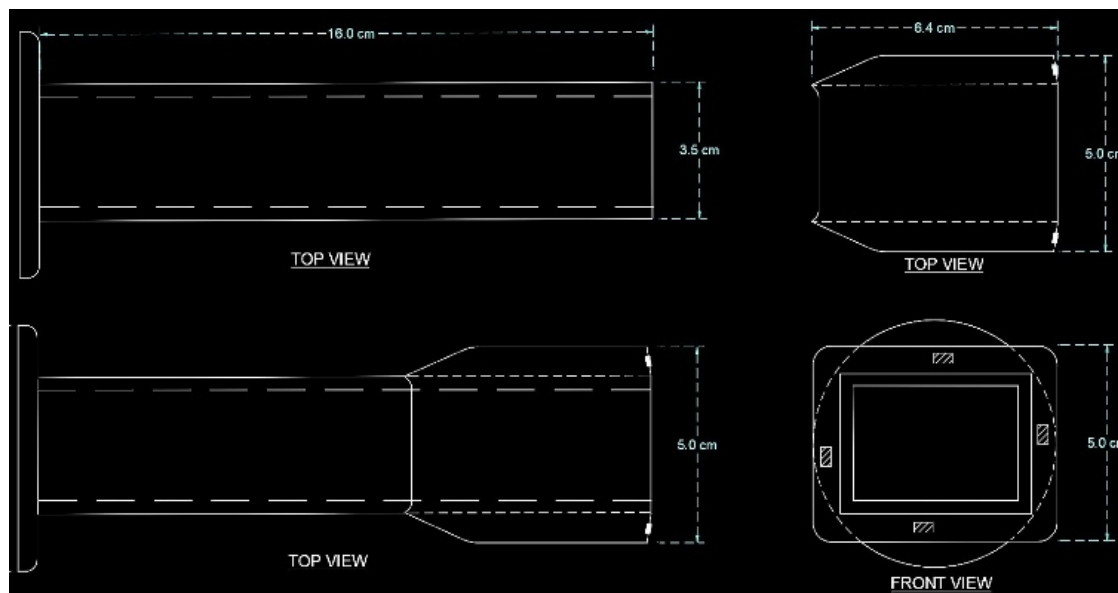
Installation of Sensors' Package on the intermediate part, Two-dimensional view
